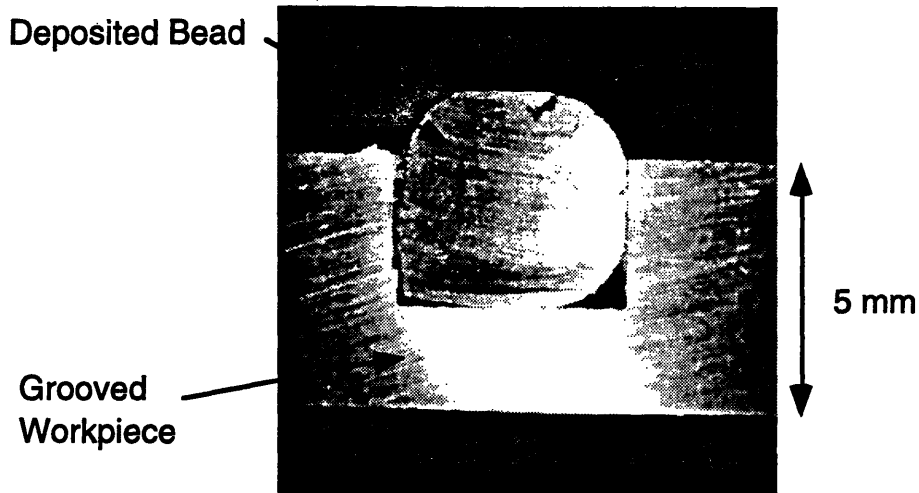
Stream Weld with Bead Deposited in Groove
